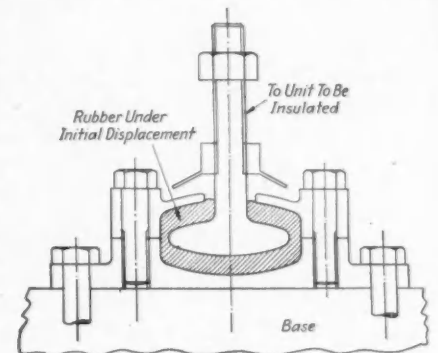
SHUDDER-PROOF INSULATION FOR INDUSTRIAL MACHINERY
